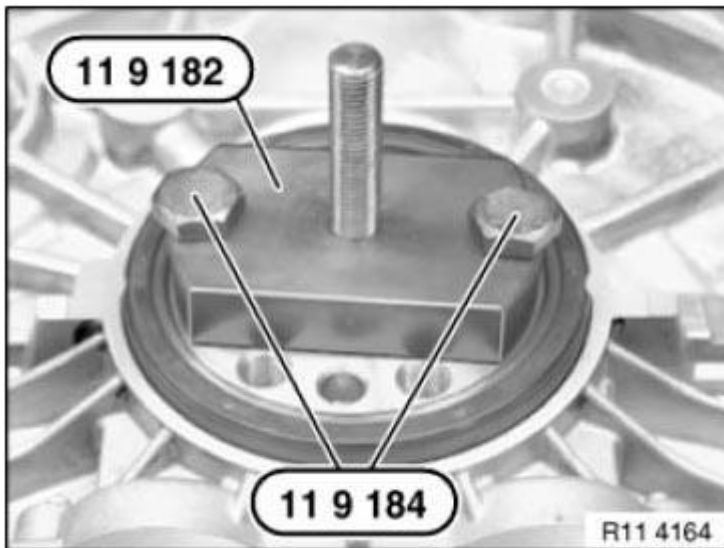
Mounting Special Tool 11 9 182 Over Crankshaft Using Screws
